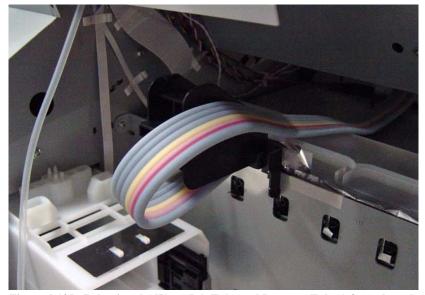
Releasing the Waste Ink Tube and Pressure Tube (after released)
